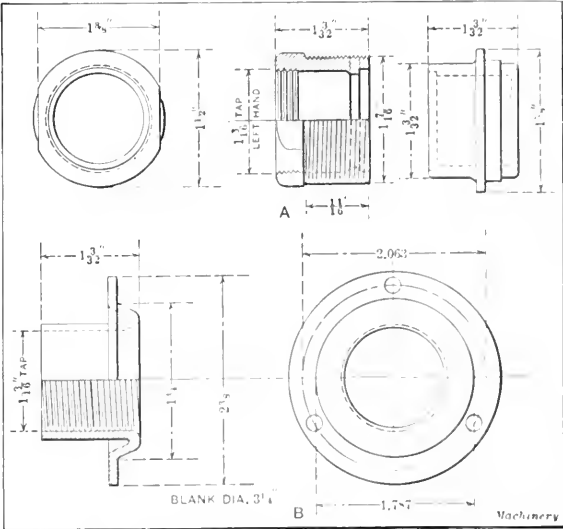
(A) Ball Race Housing machined in Oridley Automatic; (B) Ball Race Housing pressed from Sheet Steel
